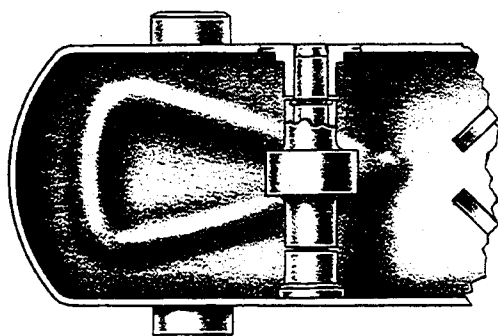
Sectional View of Treadle Assembly for E-1 Brake Valve
